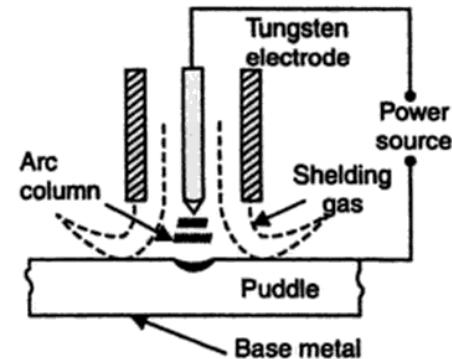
Tungsten inert-gas (TIG) welding.
